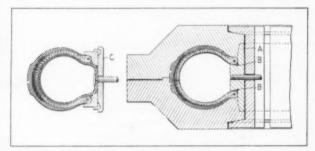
Formed Tire Casing, Fig. 4 Finished Casing in Curing Mold
